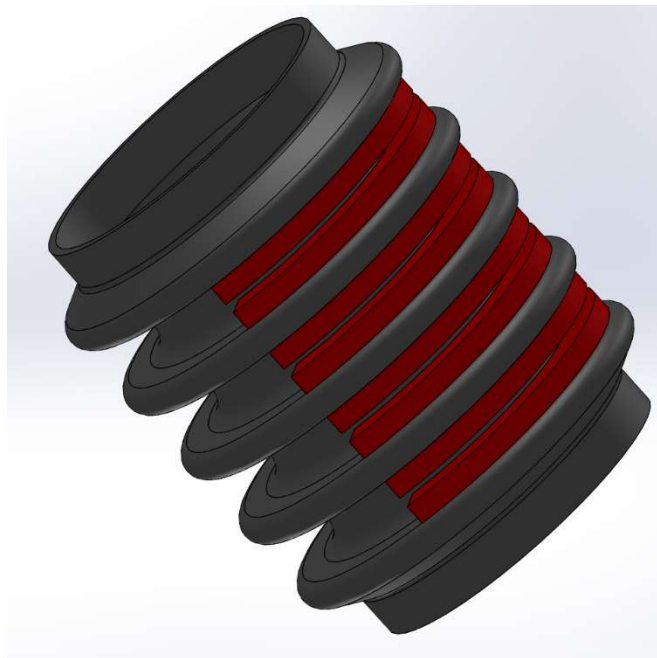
Mechanical stop design consisting of hard rubber strips which would allow flexion in only one direction protecting the operator from possible injury
